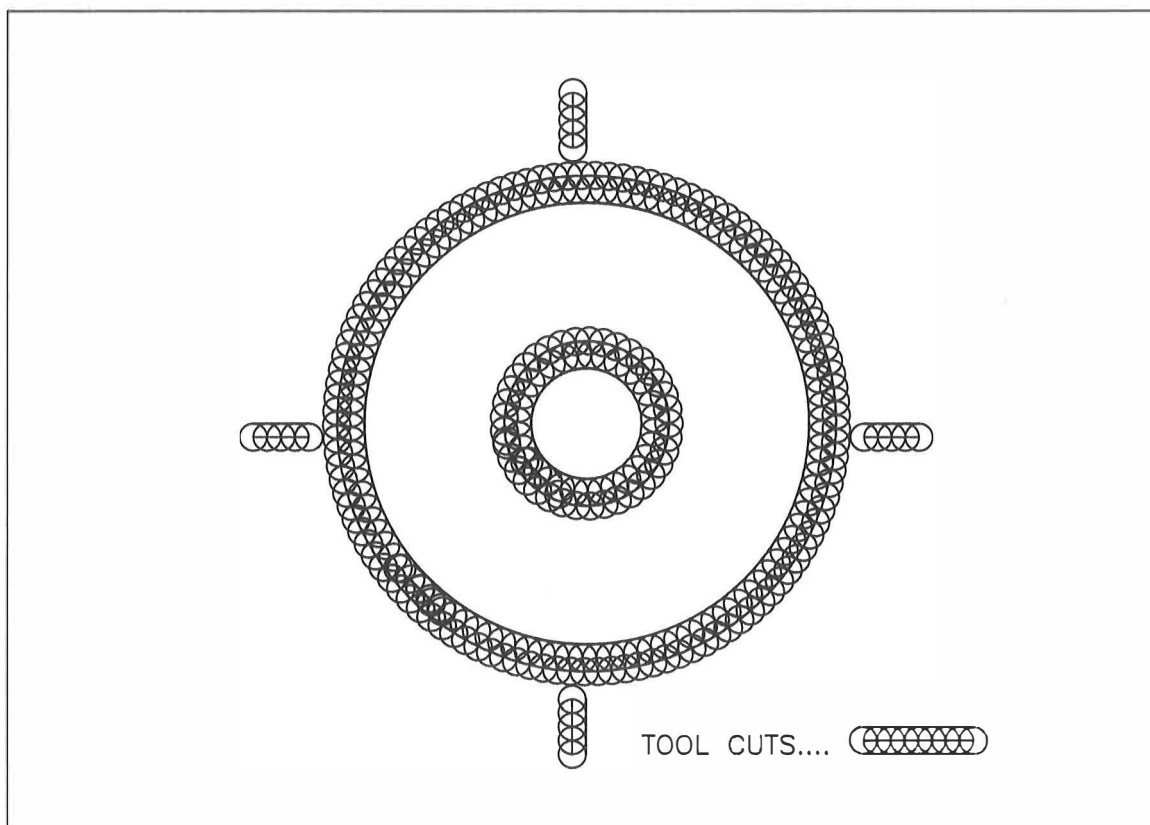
Drawing showing only the actual cuts made in the specified raw material for the 2-inch and 8-inch circles used in accuracy evaluation.
